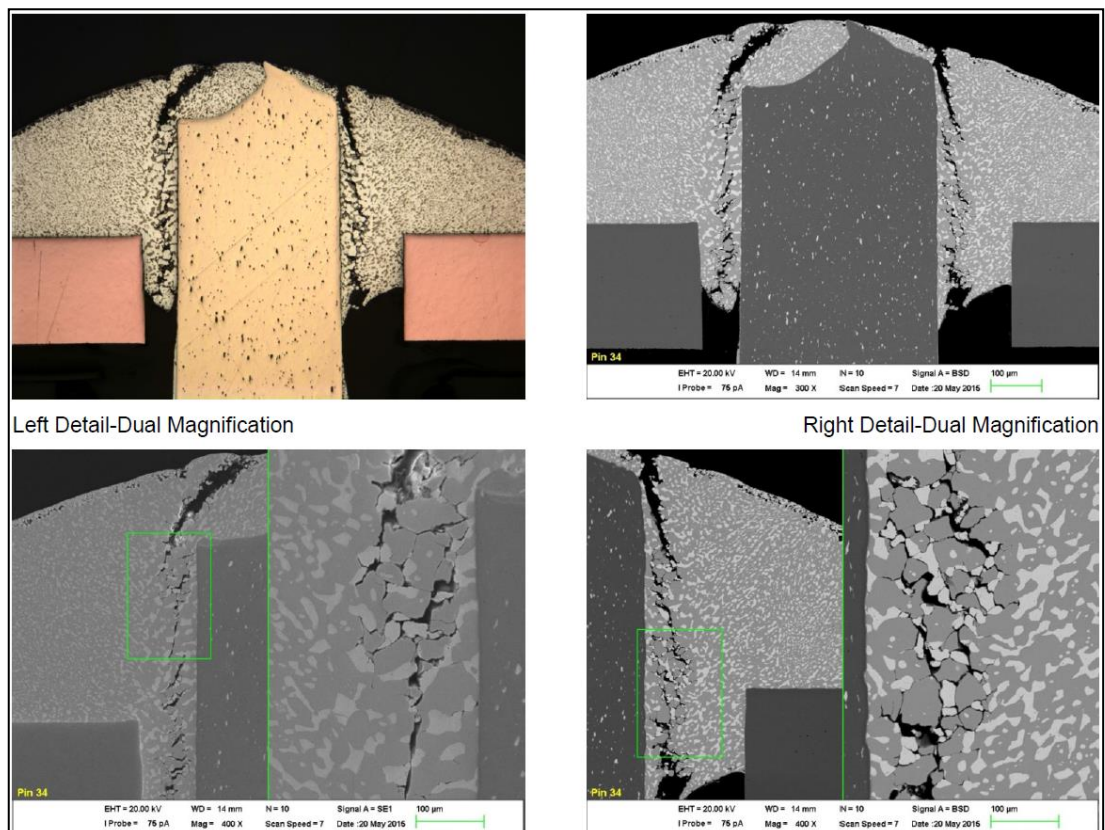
Cross sectioned pin to flex solder joints of pins 34
